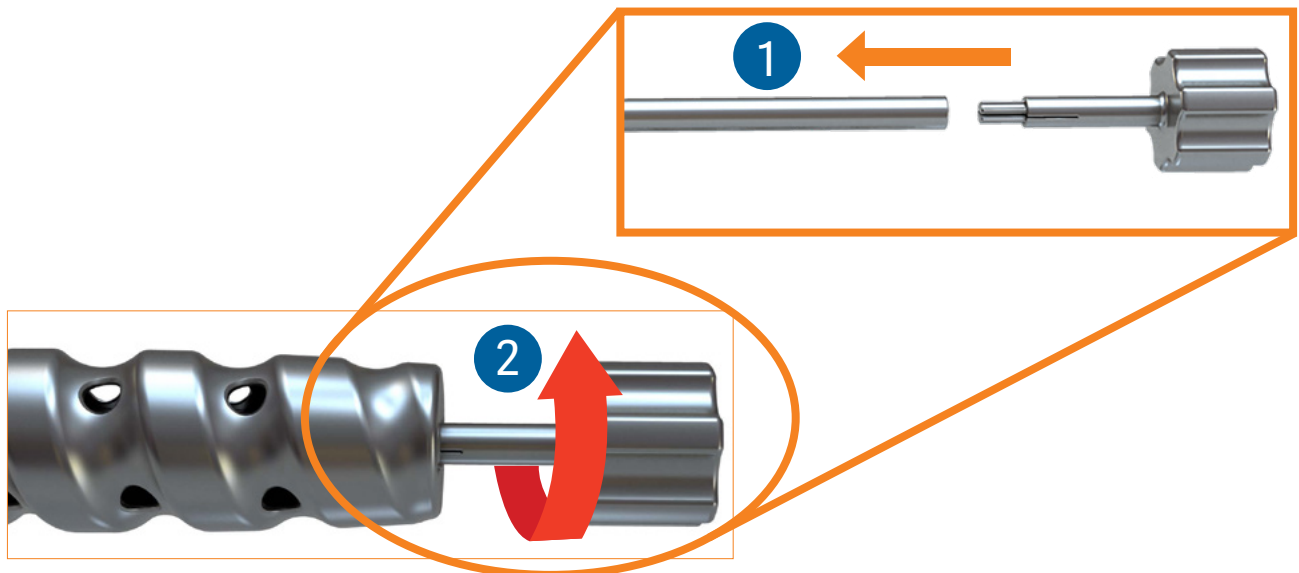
Using Draw Rod Driver (T070-0001-07) to thread Inner Shaft Rod (T070-0001-02) into Main Core Inserter (T070-0001-A3)
